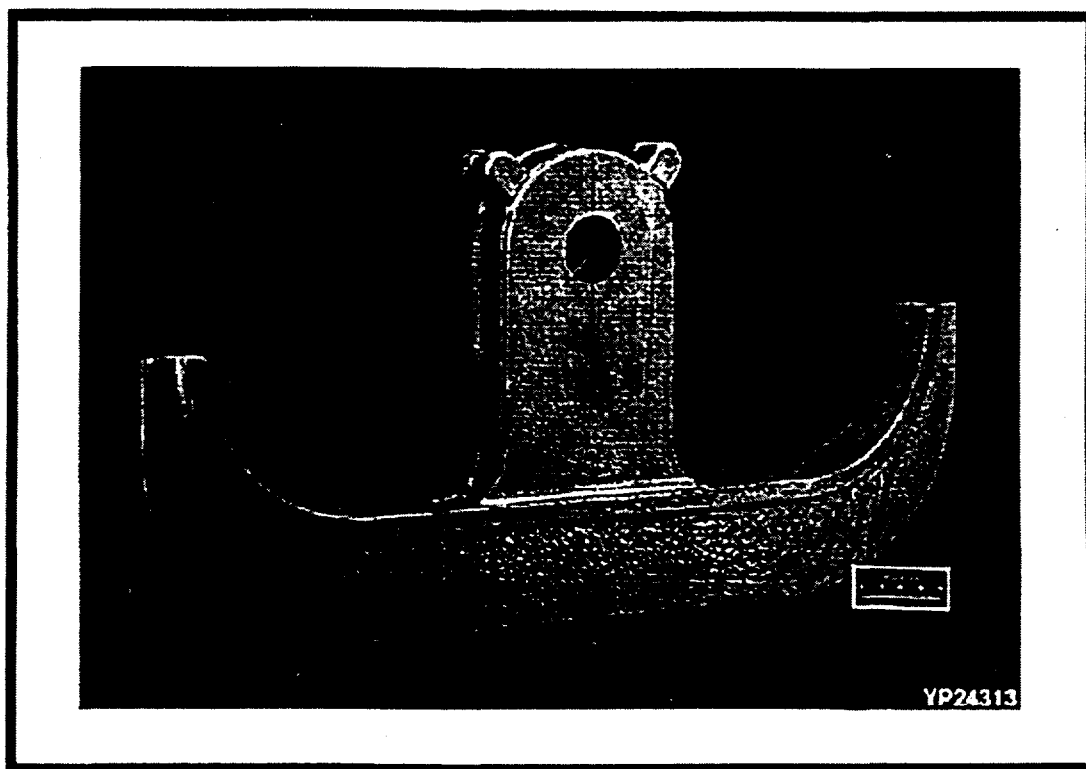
Photograph of sand-cast tube hanger of IC-221M.
